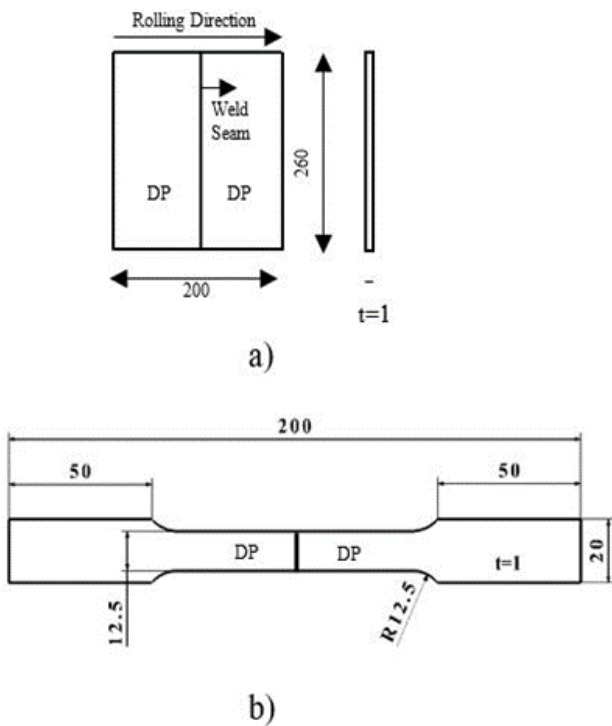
a) Schematic illustration of laser welded DP steel sheets; b) Dimensions of the tensile test specimens
